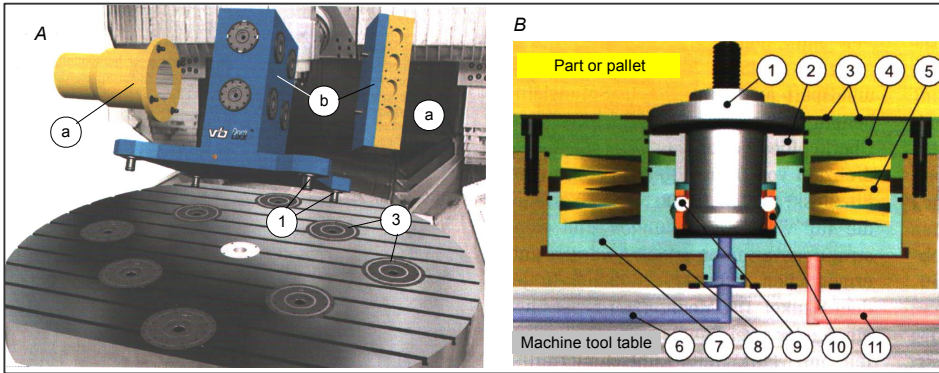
System of part and pallet fixing on the machine tool table:
